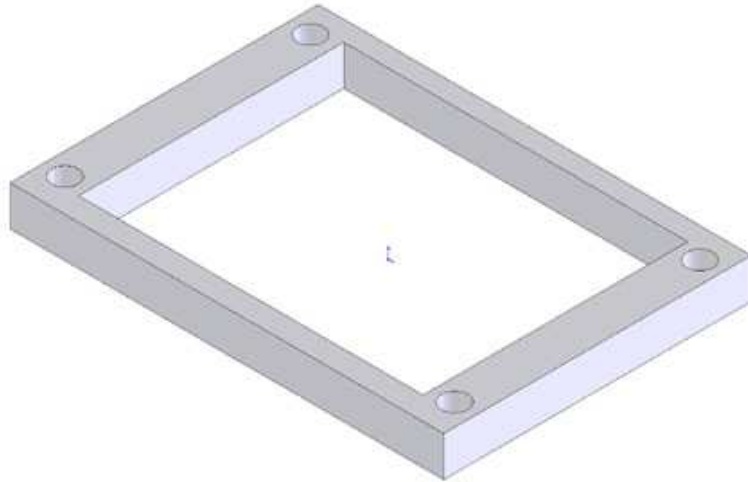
Base frame for supporting the roller support mechanism in the lower hemi-sphere of HV terminal. Dimensions are shown on technical drawings and given in appendix B with Part number 7
